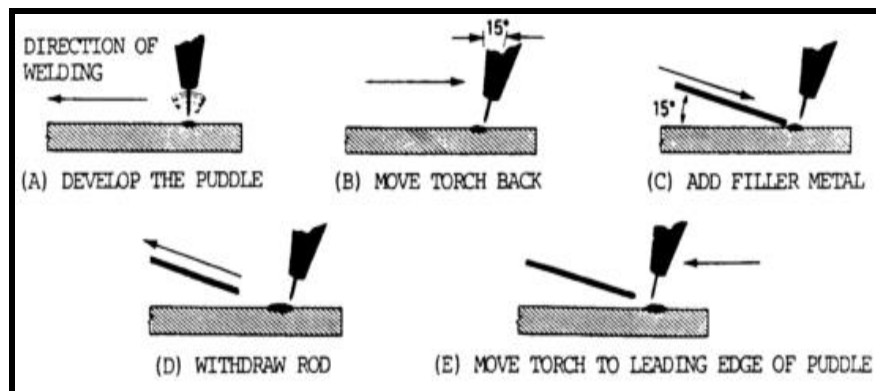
Schematic representation of welding technique in manual GTAW process.
